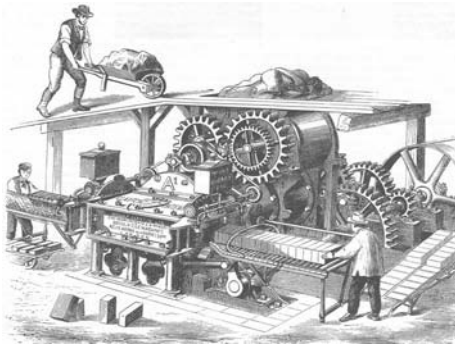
Double-acting piston extruder with preceding pug mill and roller mill, Clayton, 1862
